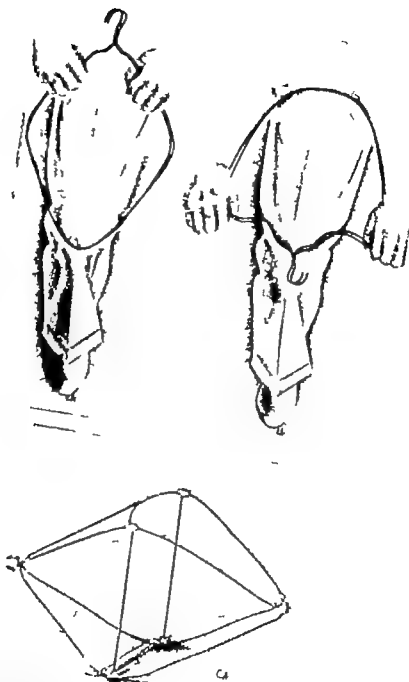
Upper left and right Method of bending two coat hangers to form the upper and lower halves of the wire frame Lower The upper and lower half stabilized by wire, secured with adhesive tape.
